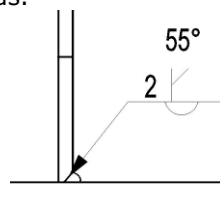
Full-penetration welds used for the beam's flange-to-column connection
